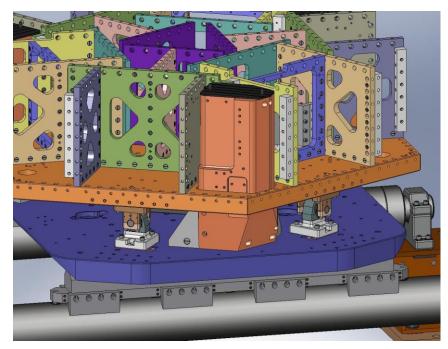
Remove (8) pins from the Locker Assemblies, before torquing the mounting screws to final spec.
